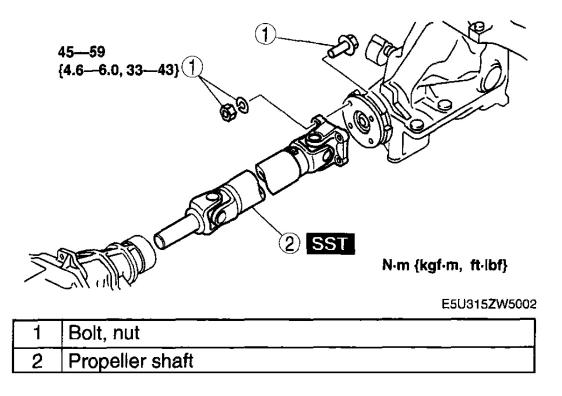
Identifying Propeller Shaft Components (With Torque Specifications) Courtesy of MAZDA MOTORS CORP.
